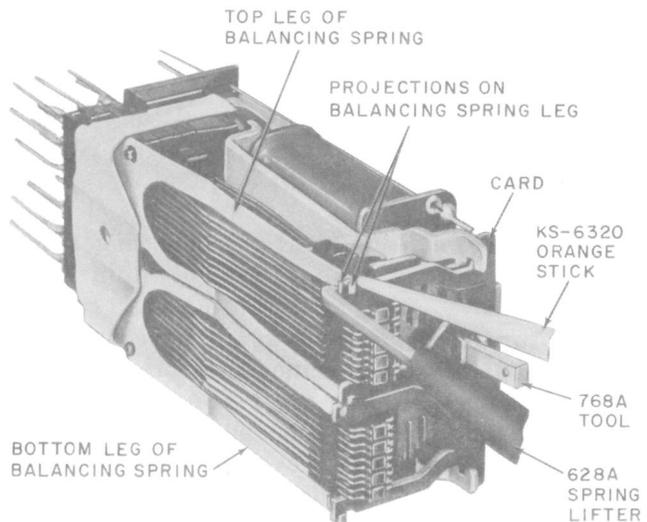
Method of Removing Balancing Spring Leg From Cord—AM Type Relay
